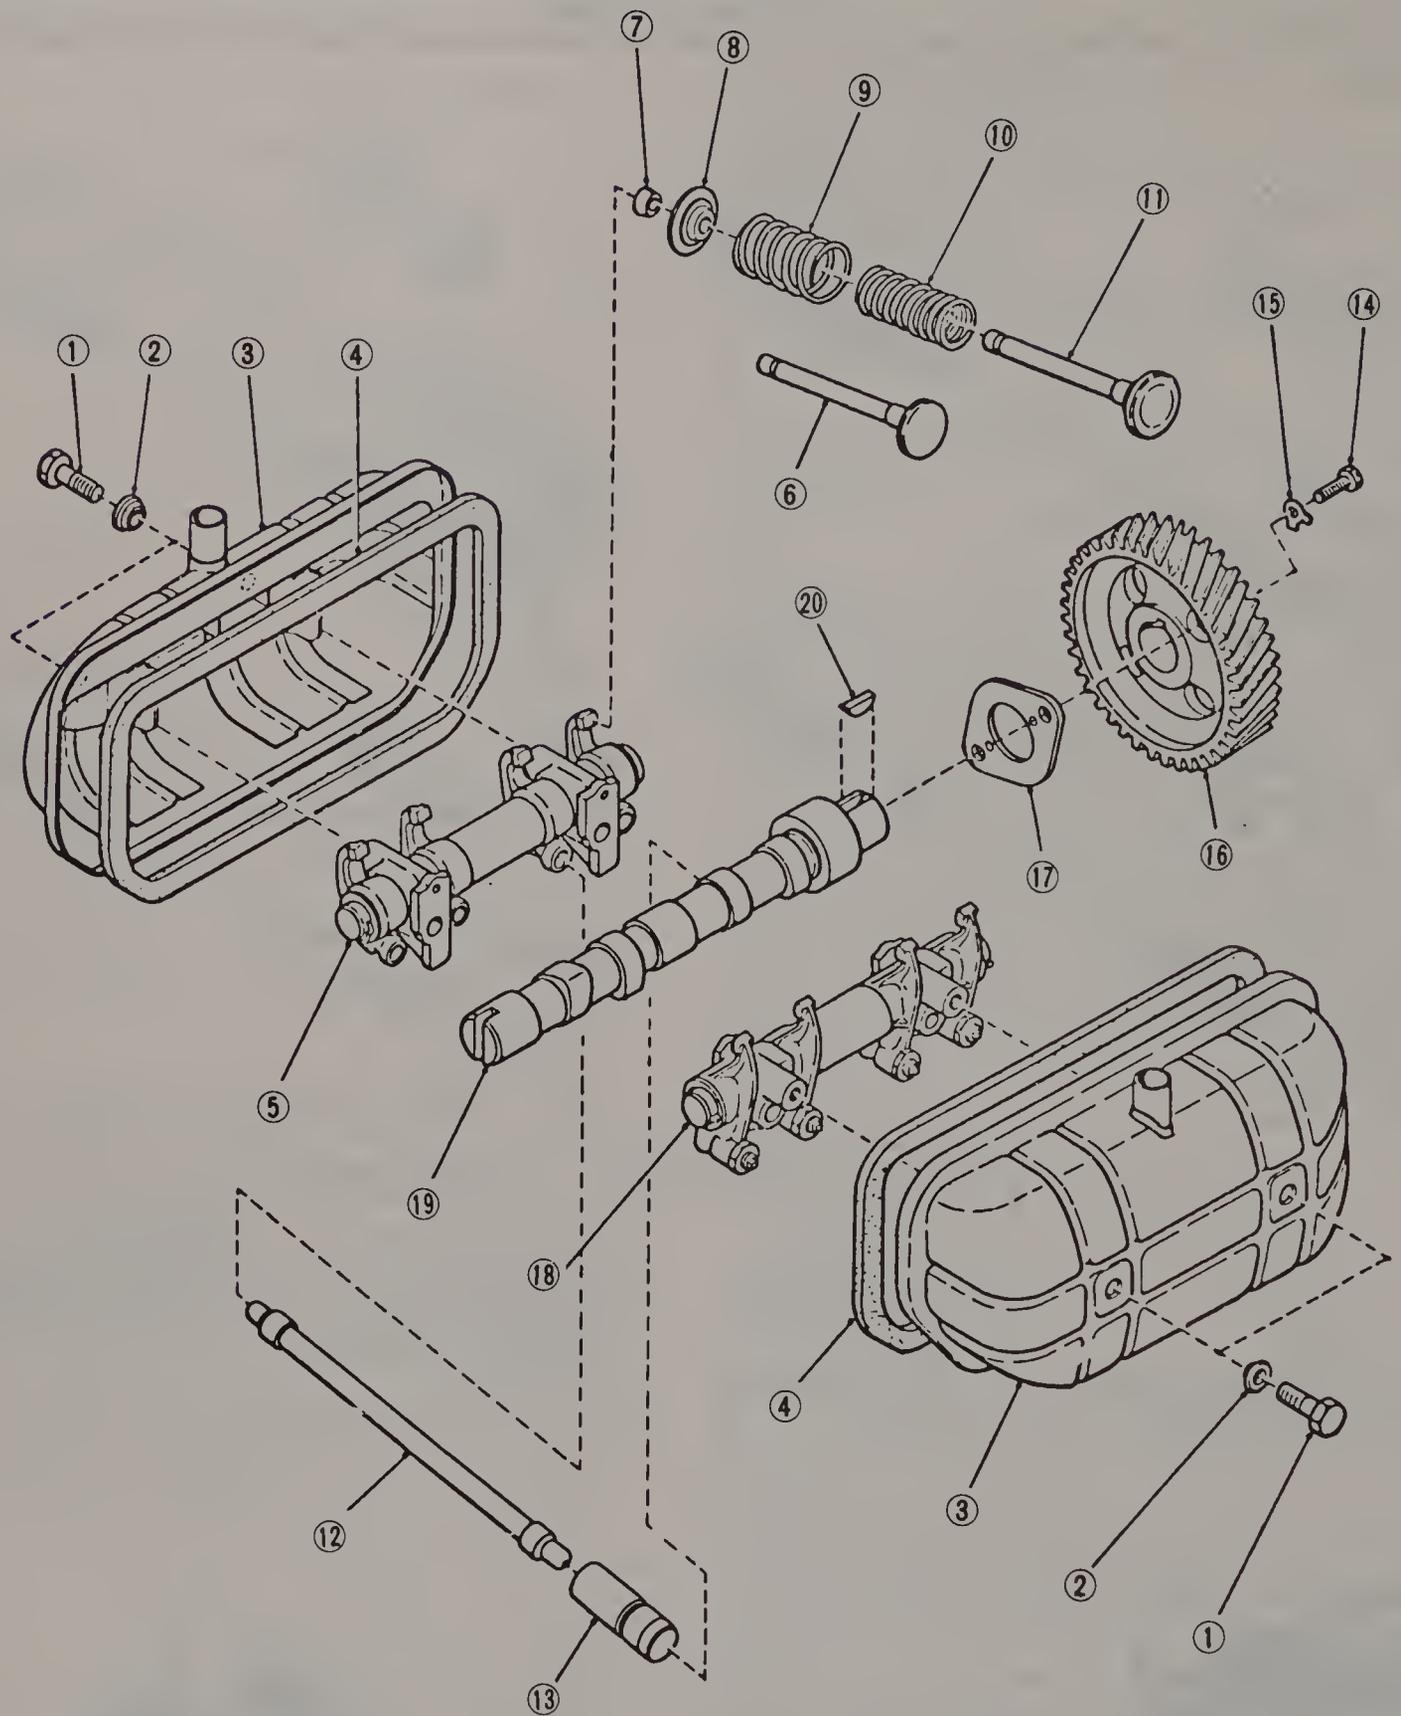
Camshaft and valve train components – exploded view (Sec 12)
